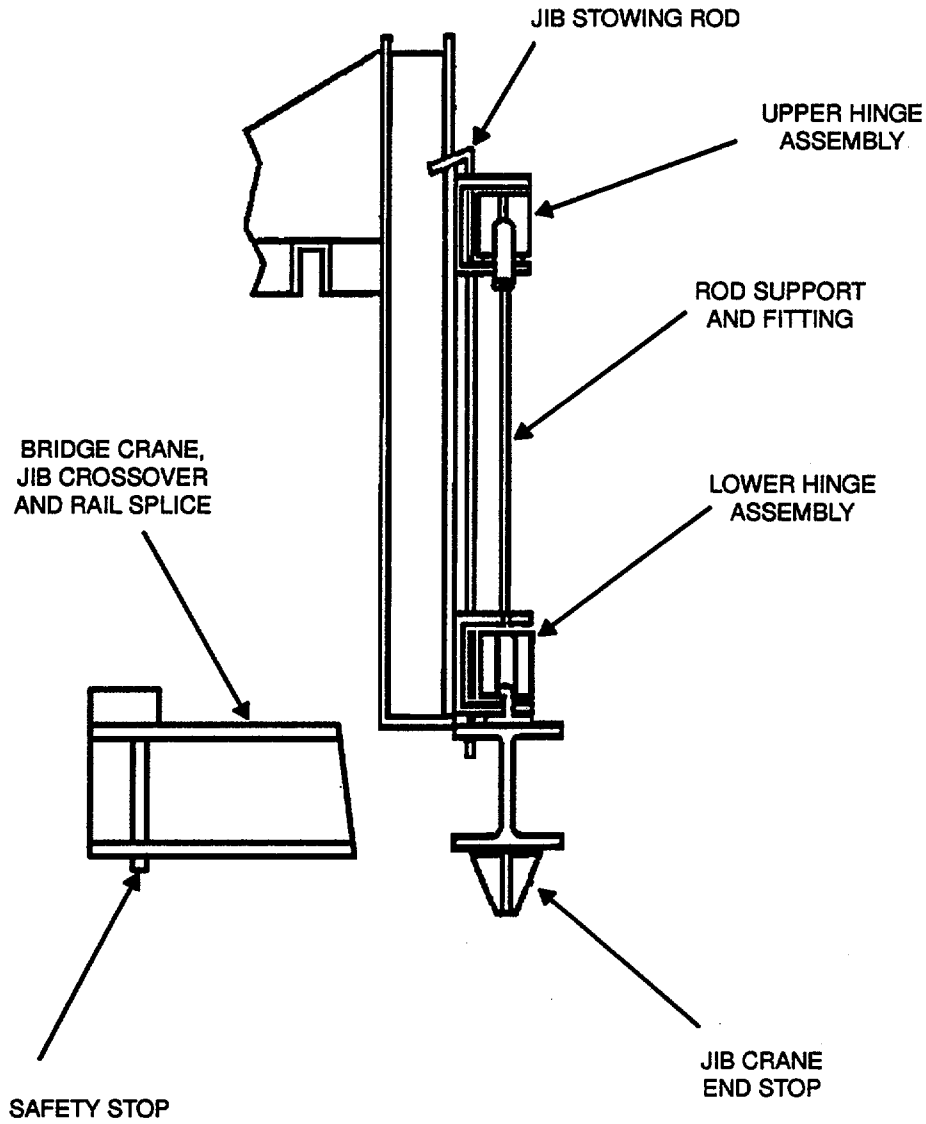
Bridge Crane Jib Rail (Stowed Toward Aft)
